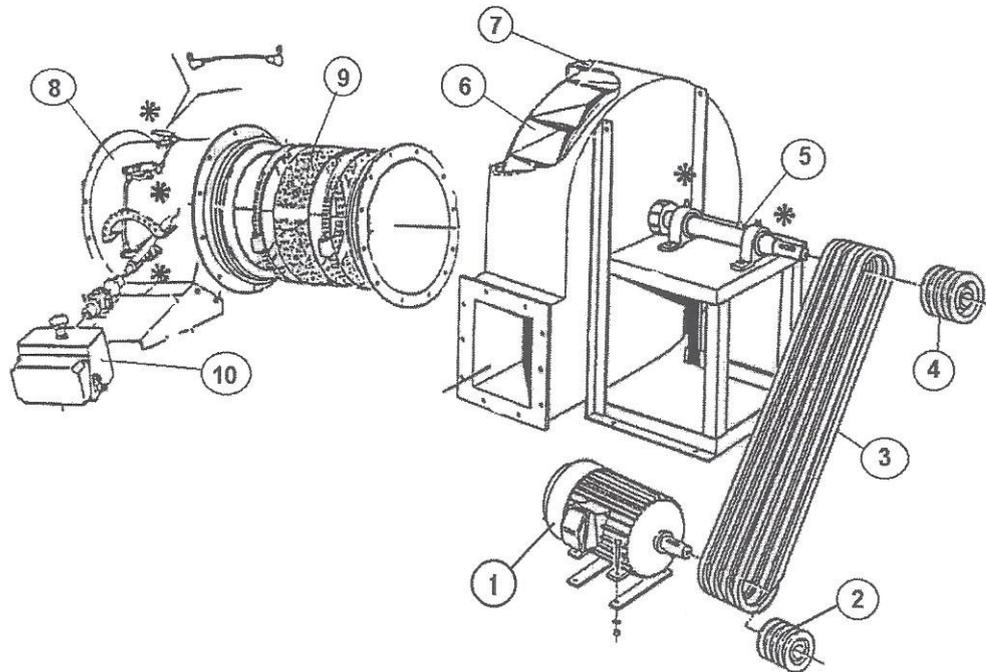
SMOKE EXTRACTOR AND RADIAL SEGMENT VALVE
